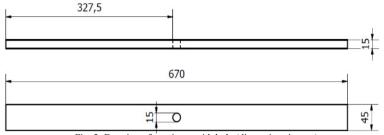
Drawing of specimen with hole (dimensions in mm).
